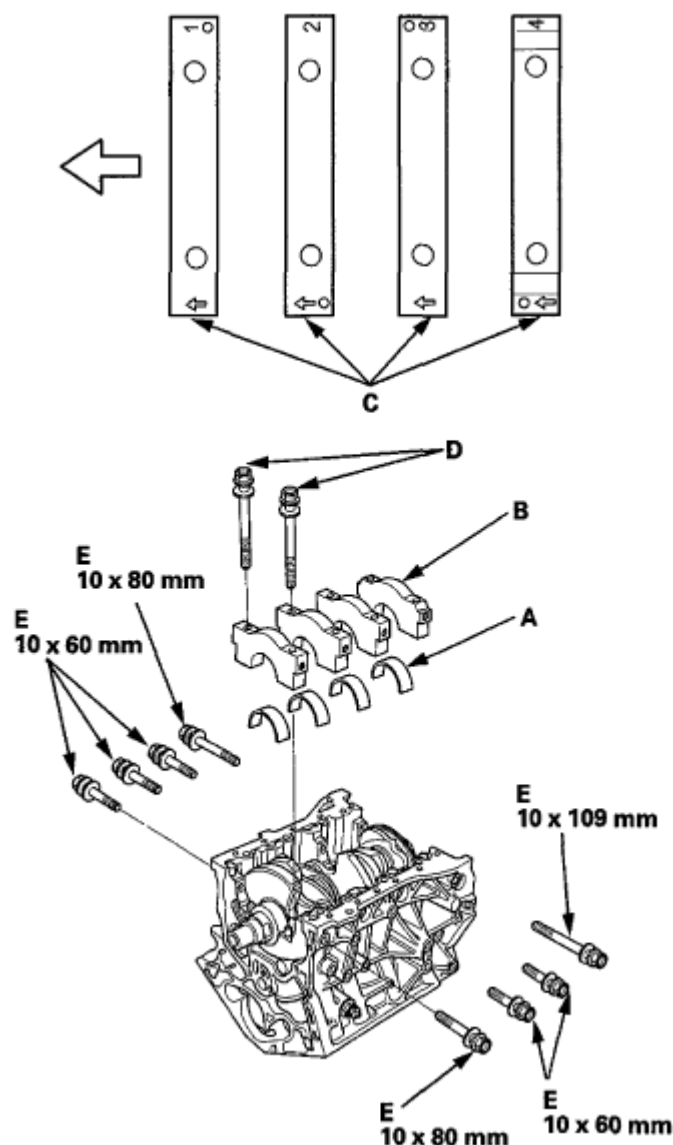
Position Of Installing Main Bearings And Main Bearing Caps With Arrow Facing Timing Belt Side Of Engine Block
